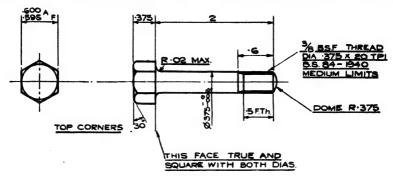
A BOLT ADEQUATELY DIMENSIONED
